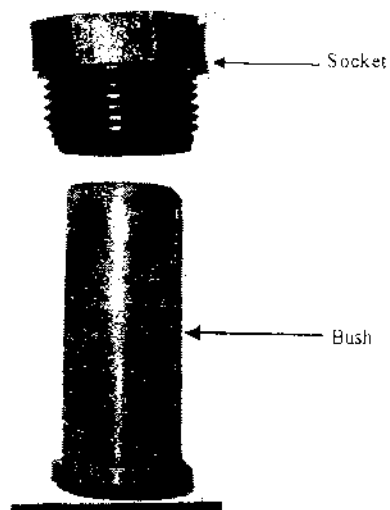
Rotating Mechanism of LEWA (Socket and Bush)
